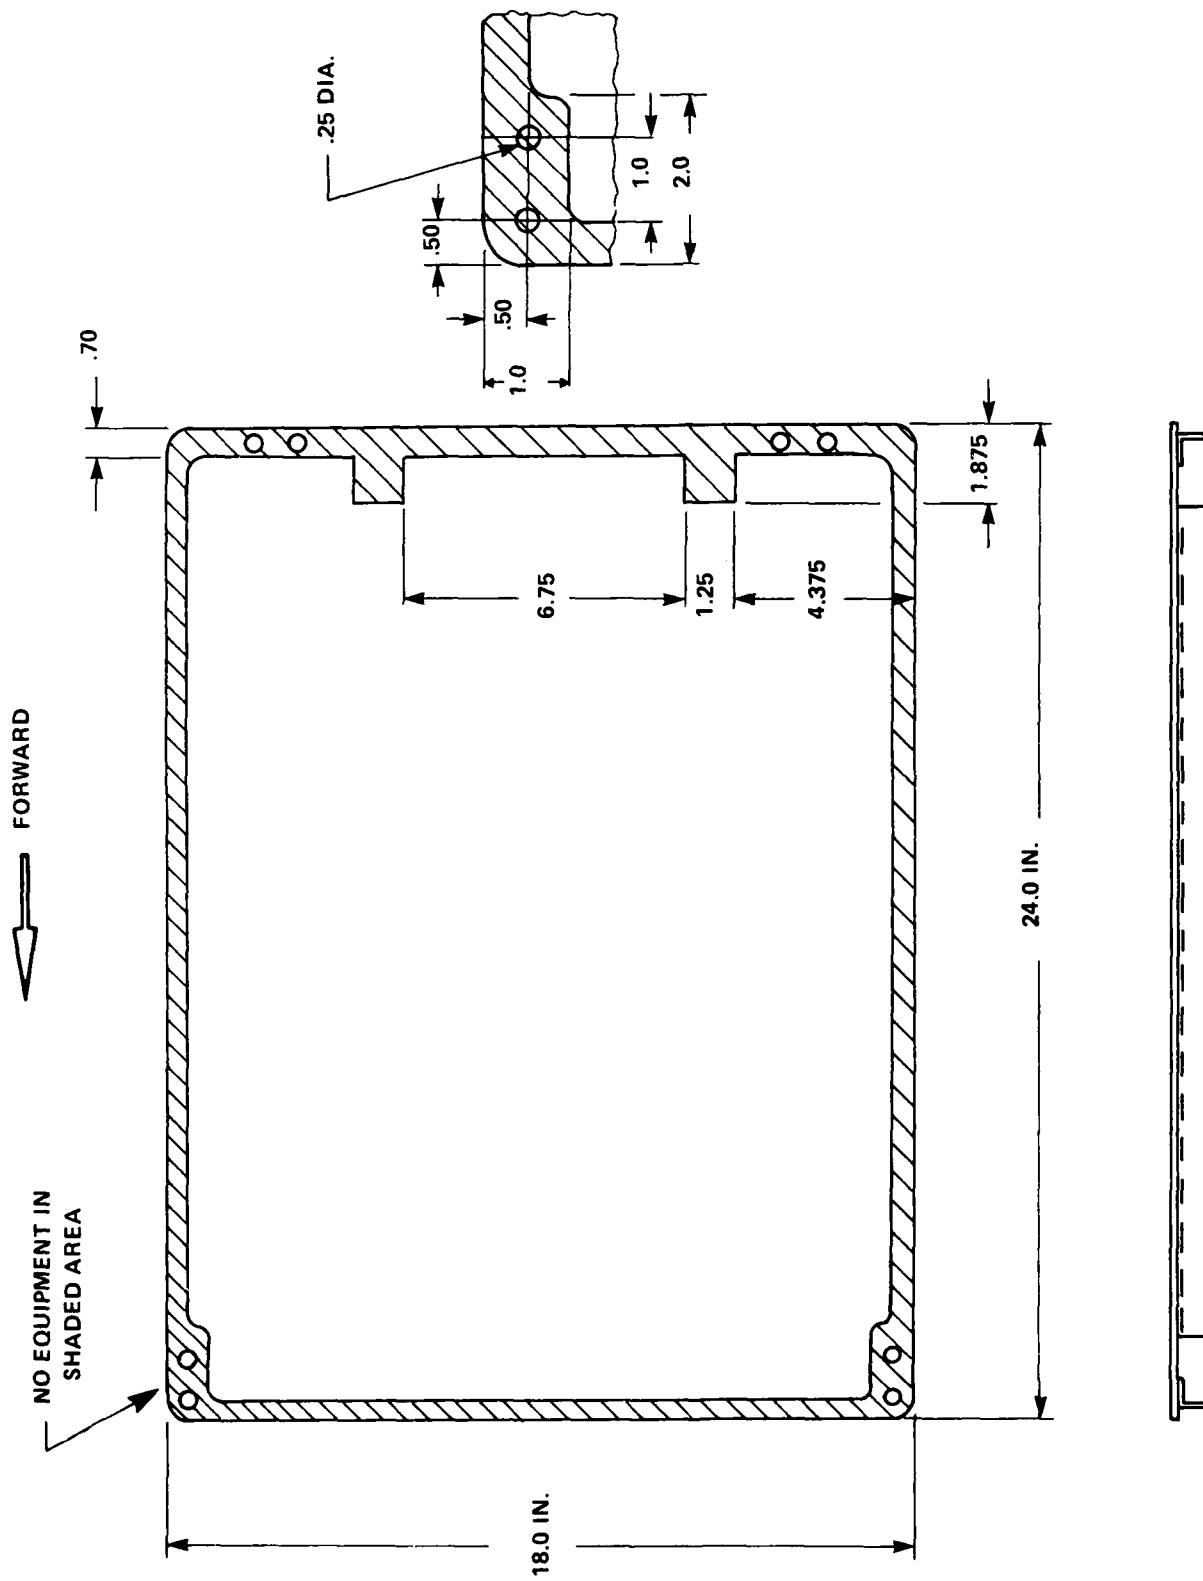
TEST EQUIPMENT MOUNTING PLATE
